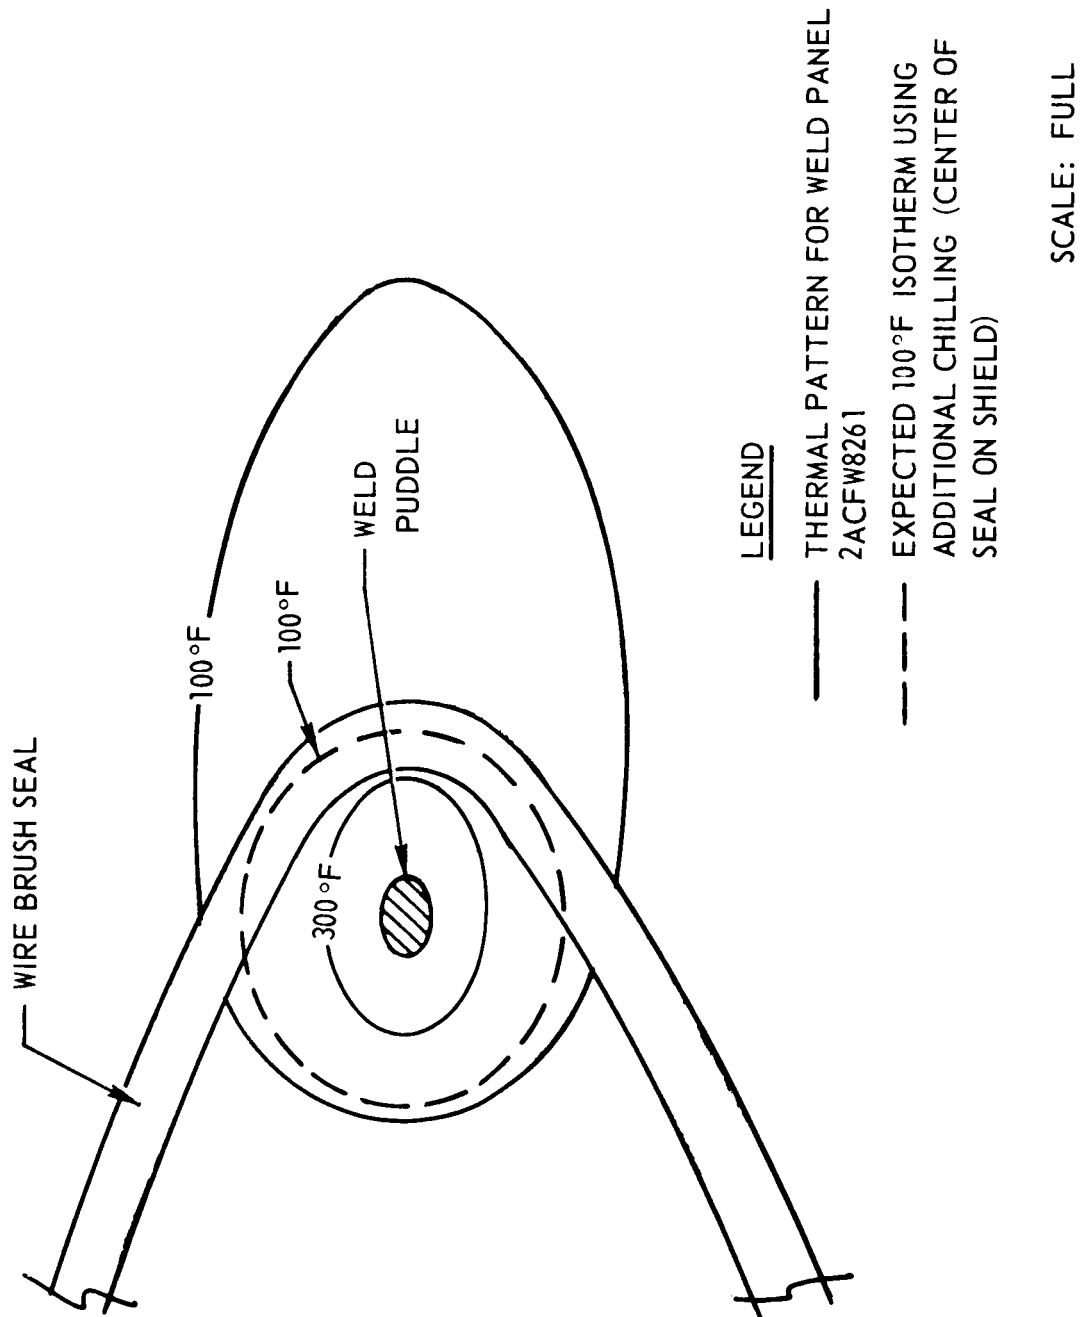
Proposed Alteration of Thermal Pattern of Weld Panel 2ACFW8261 to Obtain Zero Warpage and Residual Stress
